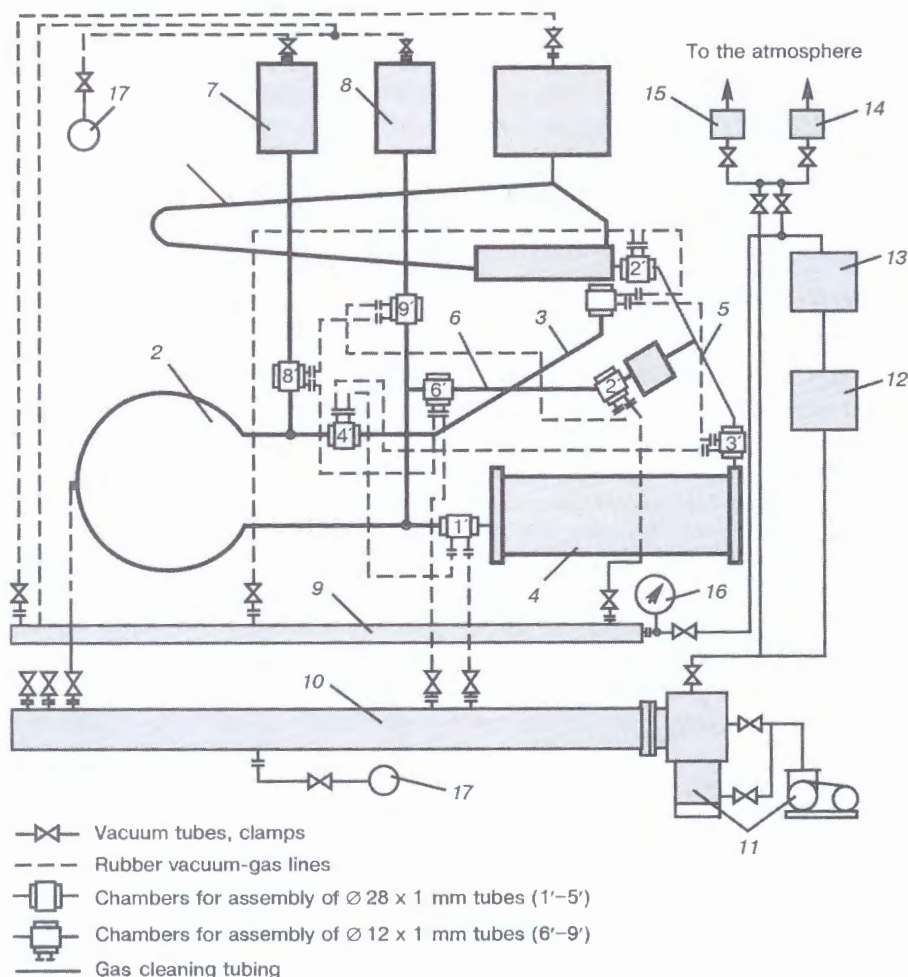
Schematic of connection of the item and welding chambers to the unit for gas cleaning and vacuum system in erection welding in the jig: 1–8 – blocks; 9, 10 – gas and vacuum collectors, respectively; 11 – vacuum unit; 12 – compressor; 13 – gas cleaning block; 14 – KhG chromatograph; 15 – hygrometer; 16 – compound pressure and vacuum gauge; 17 – manometric tube
